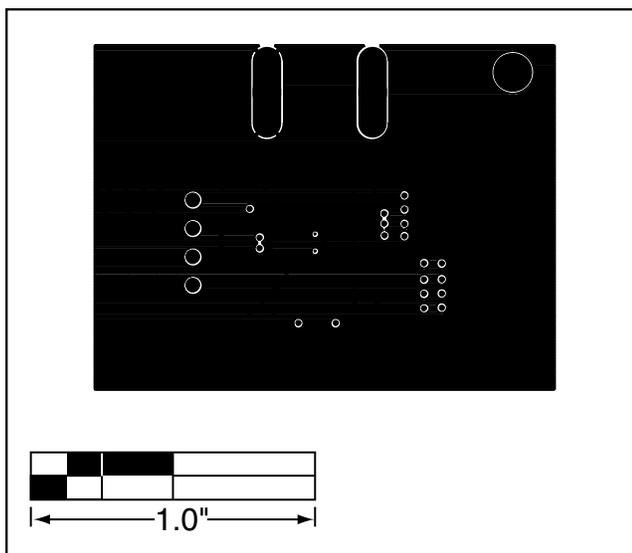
MAX2216 EV Kit PC Board Layout—Power Plane
